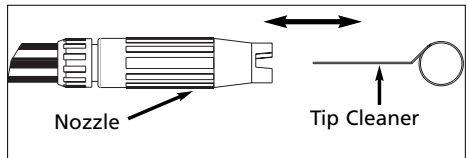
Insert tip cleaner in nozzle hole and move back and forth until debris is dislodged.
